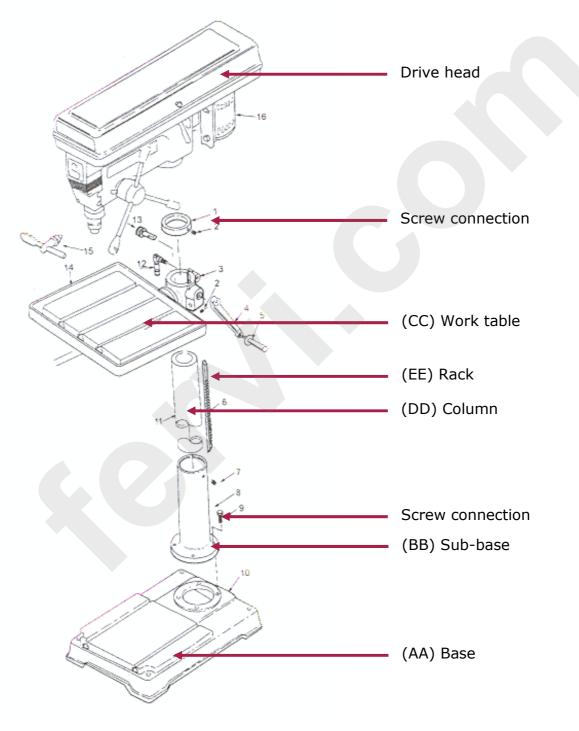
Exploded view Art. 0754/230V Art. 0754/400V.
